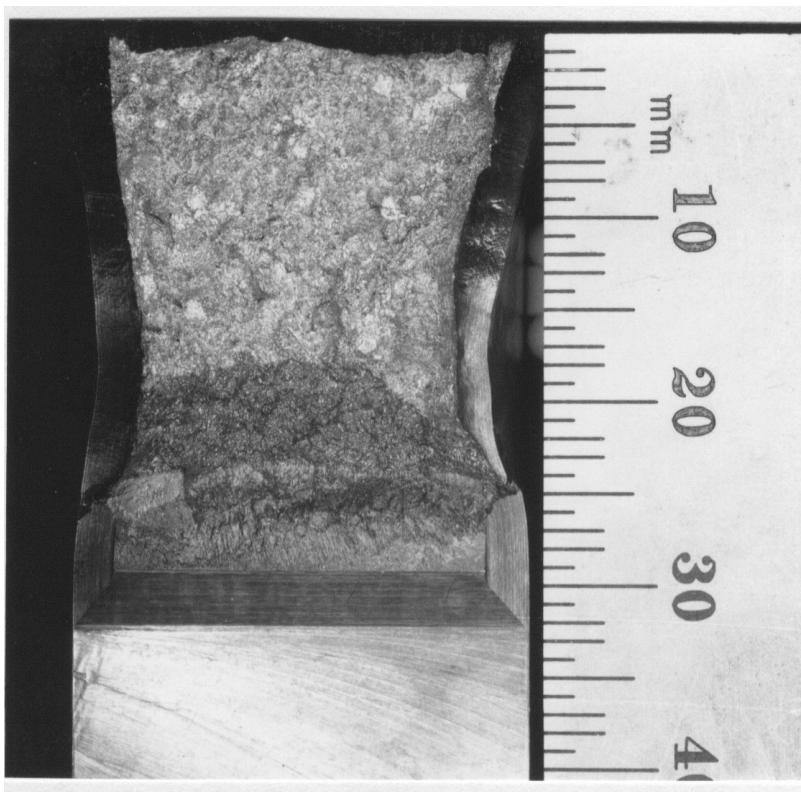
Fracture surface of essentially unaged material MA9 from the hot-leg main shutoff valve tested at 290°C
